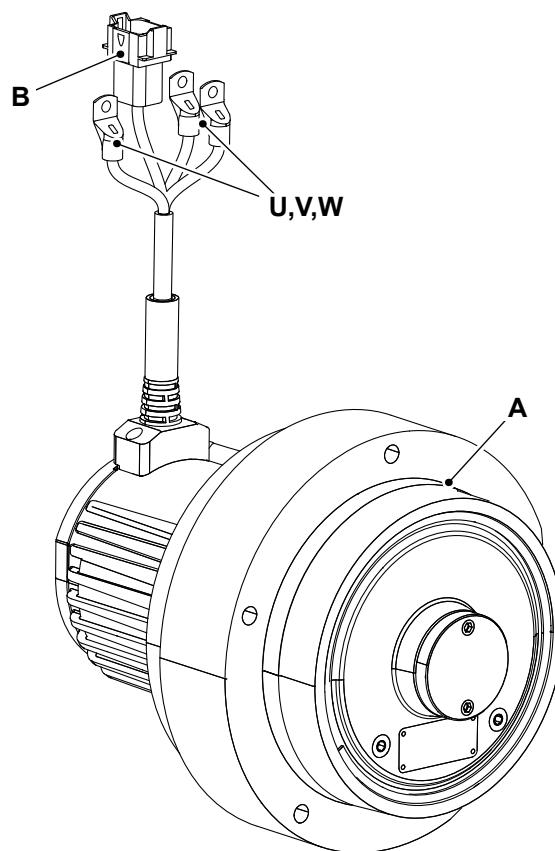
Component Identification of Wheel Drive Motor (S2632E EDRV)
